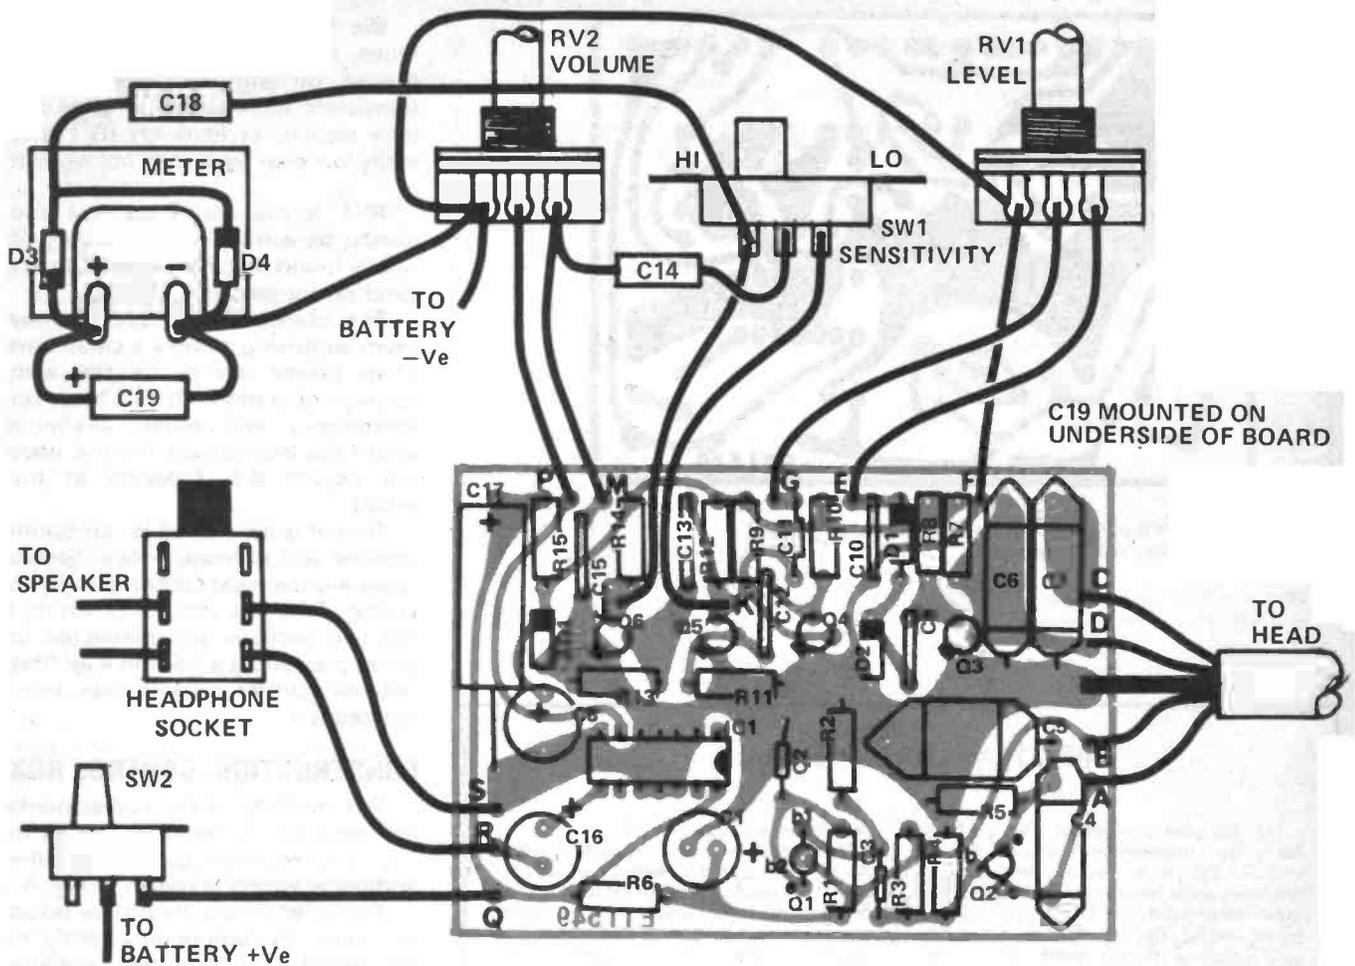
The component overlay and wiring diagram to other parts of the circuit not on the PCB.
